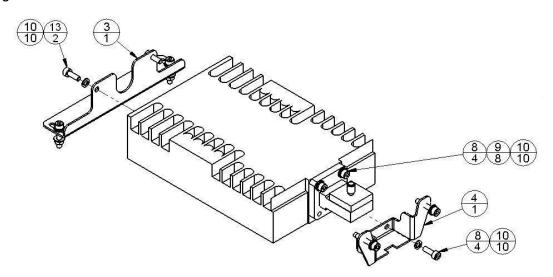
GILAT Ku-Band ODU (BUC) Assembly (with Brackets)
